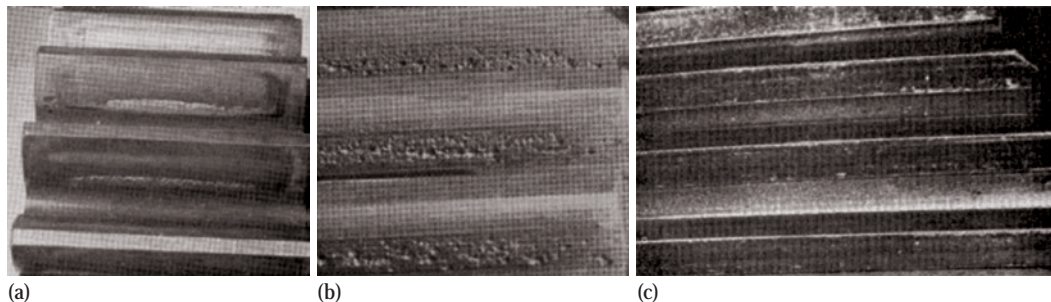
Examples of macropitting: (a) spur, 60 HRC; (b) helical, 35 HRC; and (c) helical, 35 HRC. In general, gears that have initial pitting have macrosized pits. Lower view c shows ledge wear as a result of macropitting for thousands of hours.
